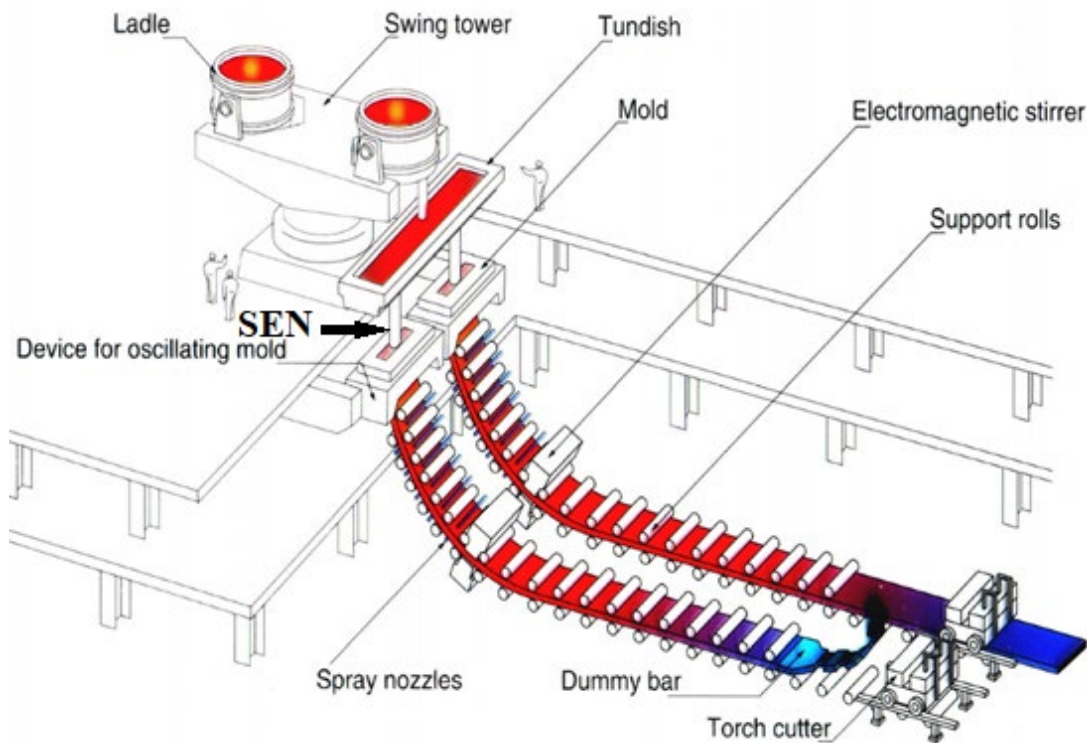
The continuous casting process of a steel plant showing the various section of the casting operation. The pre-heated SEN is positioned between the tundish vessel and the mold after its installation or in casting position. Molten steel arrives in ladles and are emptied into tundish before finally cooling with the help of mold and spray nozzles (image adapted to show position of SEN)[54].
